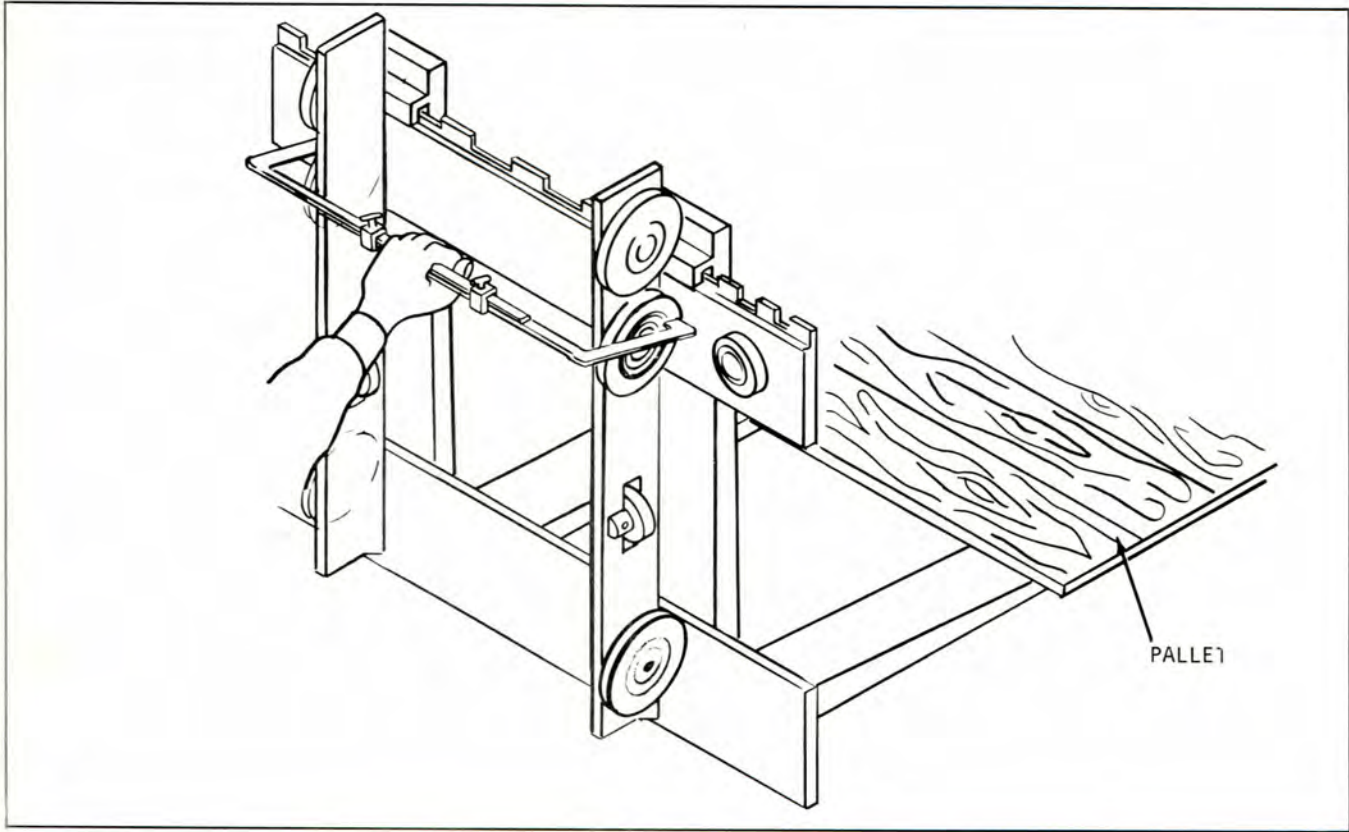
Spanning Upper Rollers (Six Roller Carriage)
